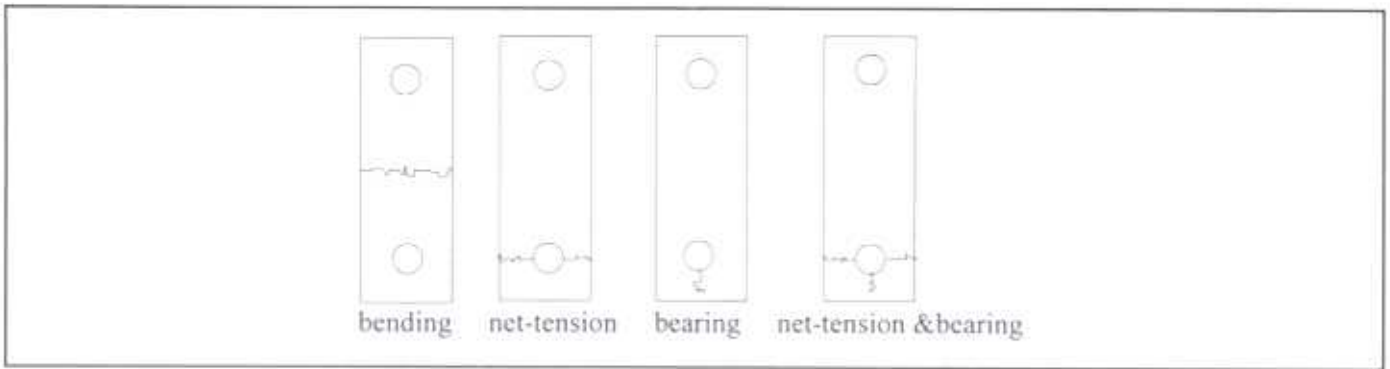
Failure Modes of Single Bolted Joints.
